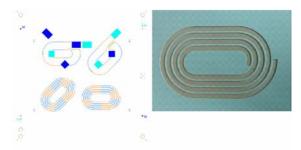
Pictures of a thick film structure for a coil as transformer part in a LTCC multilayer, left: CAD design, right: Photograph of lasered channels inside the green tape.
